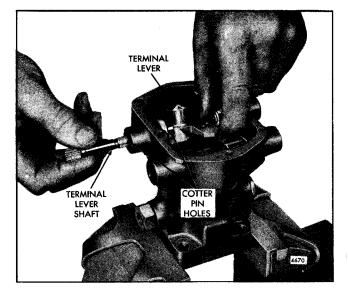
Installing Terminal Lever Shaft in Governor Housing and Terminal Lever
